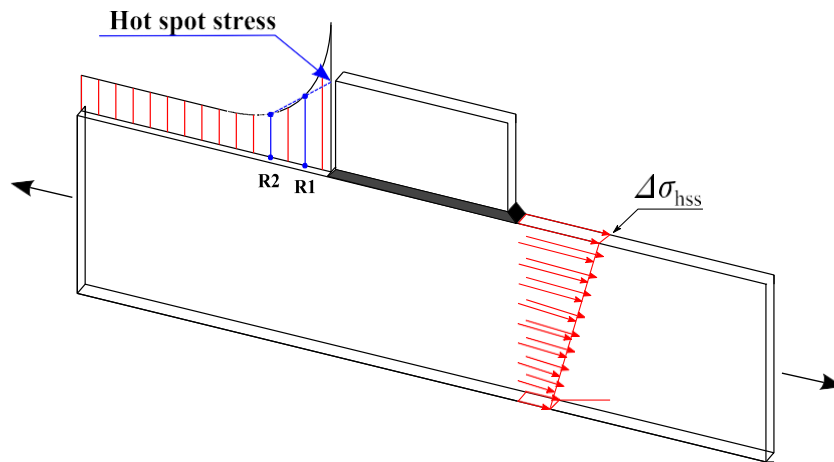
In a plate edge joint, a hot spot stress is defined at the weld toe[5].
